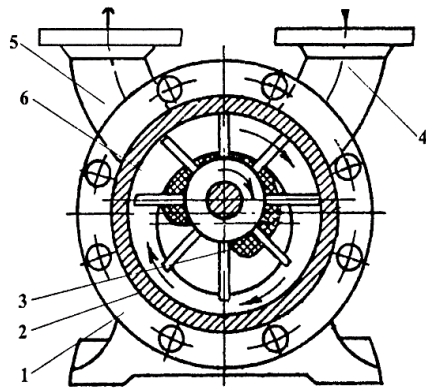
Machine with axial feed: 1 – housing; 2 – cover; 3 – rotor shaft; 4 – suction connection; 5 – discharge connection; 6 - water ring
